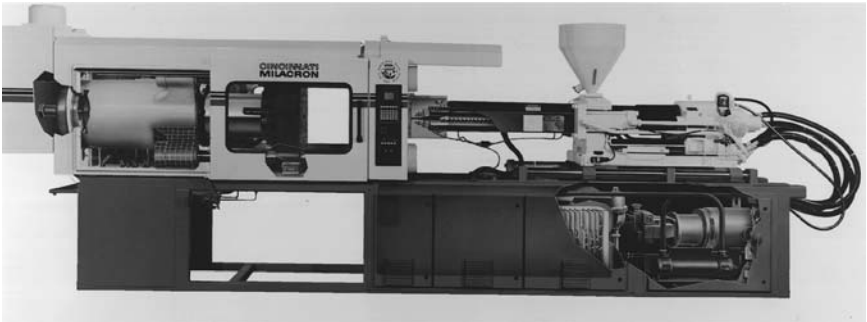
Horizontal molding machine. (Courtesy Cincinnati Milacron)
